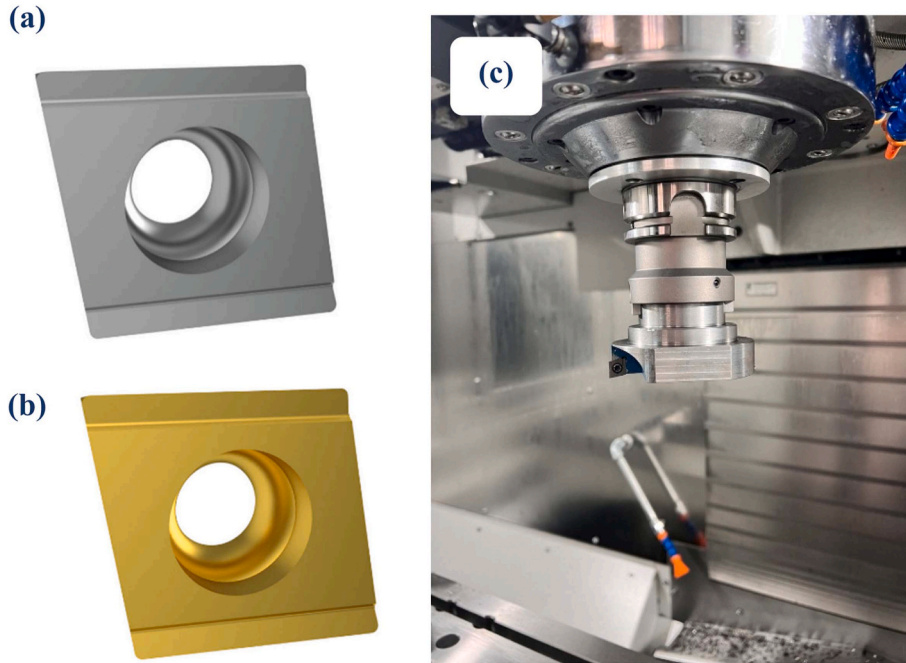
a) Gühring® CCHT 6682 (uncoated), b) CCHT 6684 (TiN-coated) insert and c) cutting tool holder.
